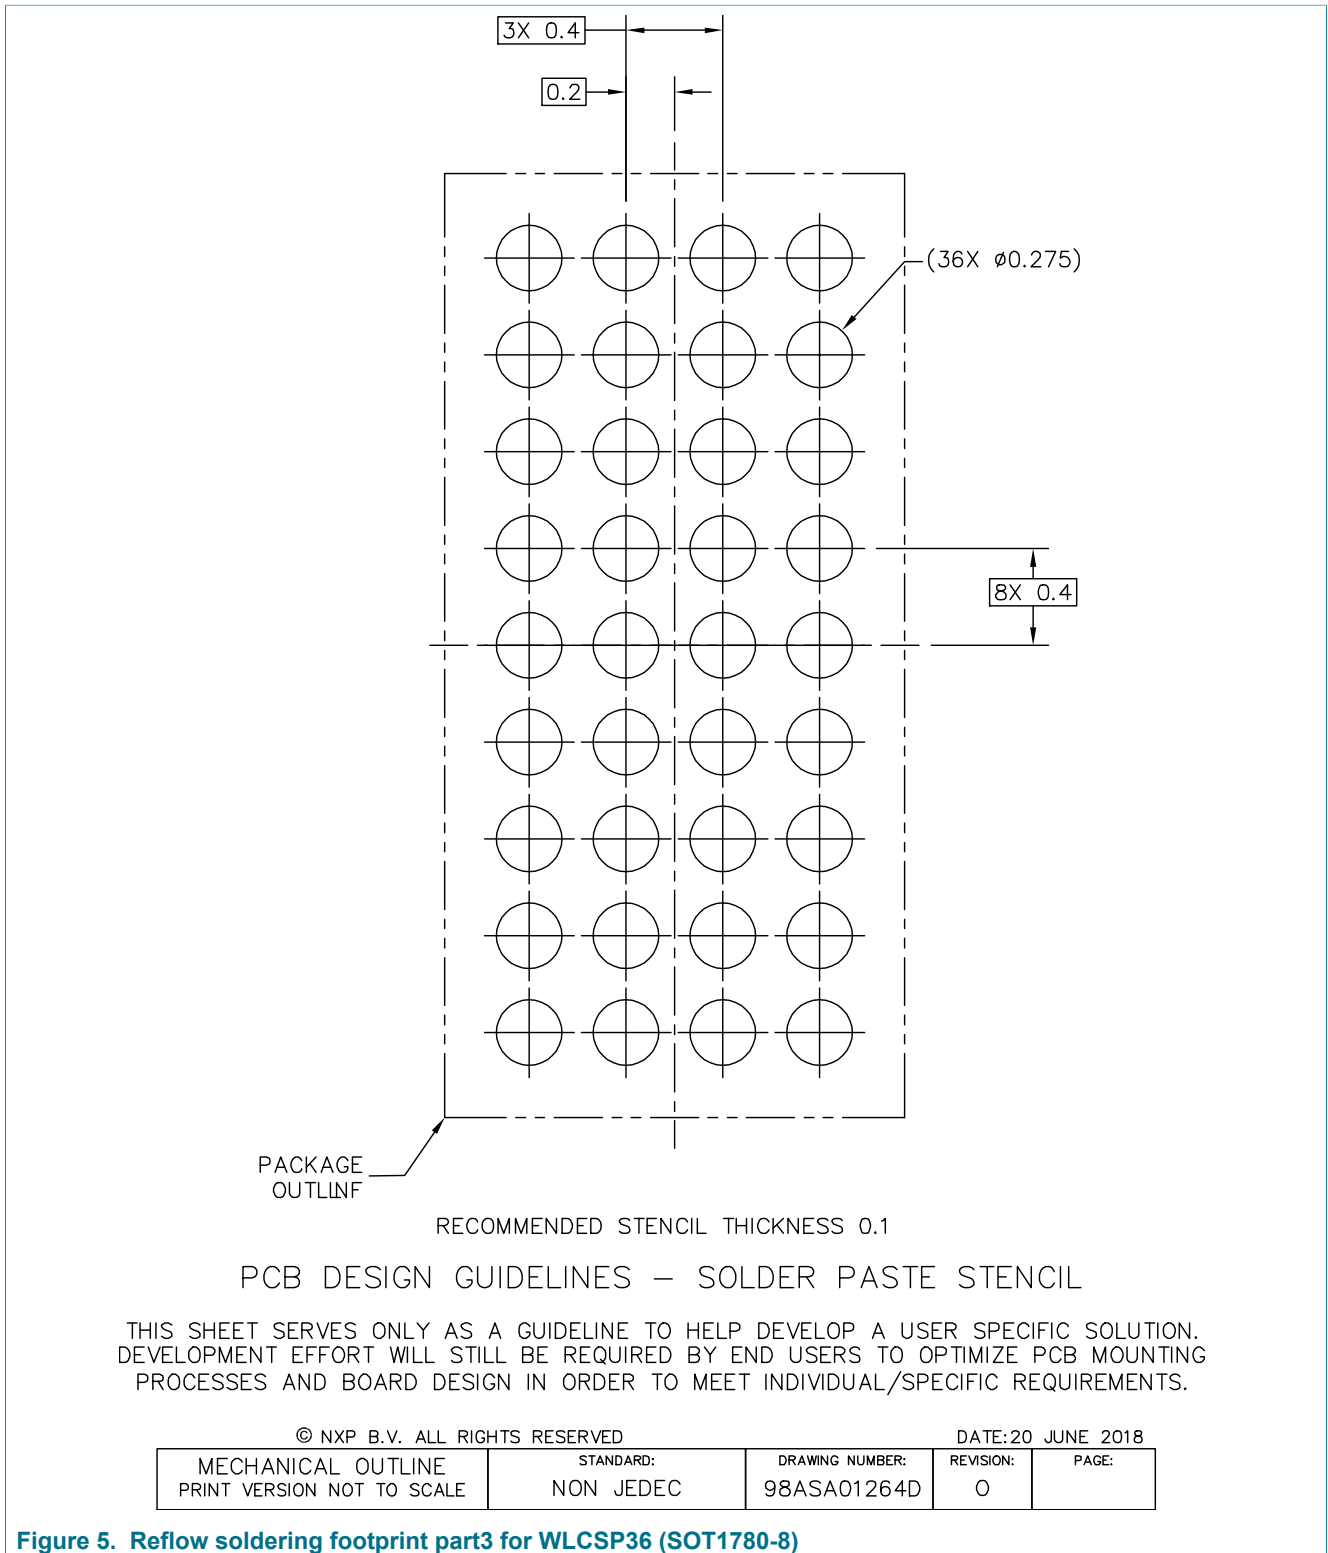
Reflow soldering footprint part3 for WLCSP36 (SOT1780-8)
